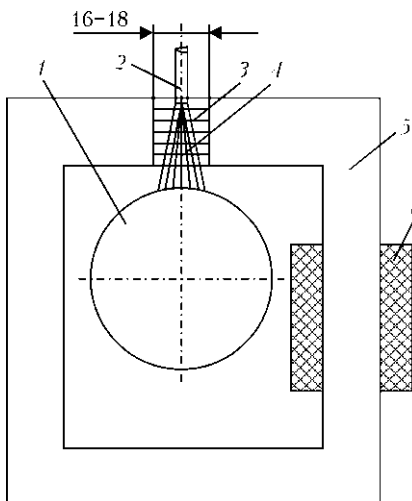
Schematic of ID for TMF application to arcing zone in welding [12]: 1 – surfaced sample; 2 – electrode wire; 3 – magnetic lines of force; 4 – welding arc column; 5 – electric magnet core; 6 – coil
